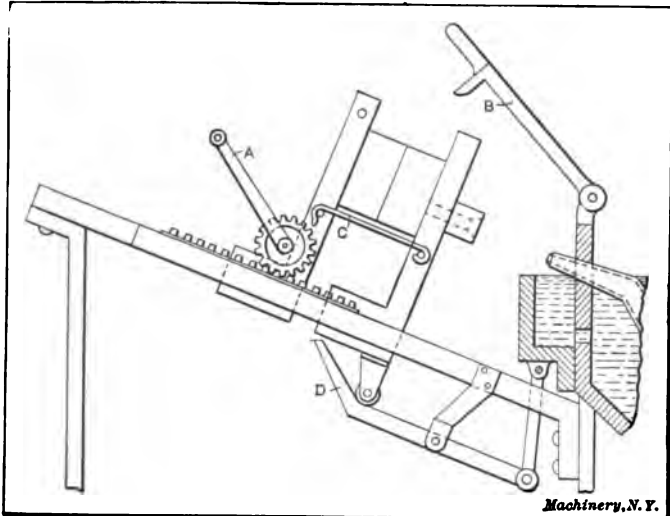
Rack and Pinion used to part the Mold and draw it away from the Spout
